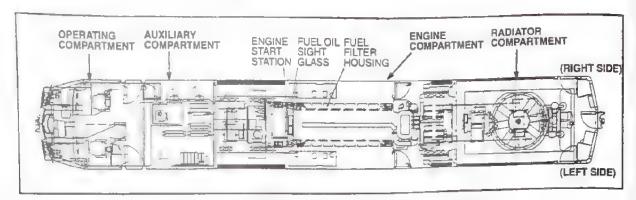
ENGINE START EQUIPMENT LOCATION. E-42792.
